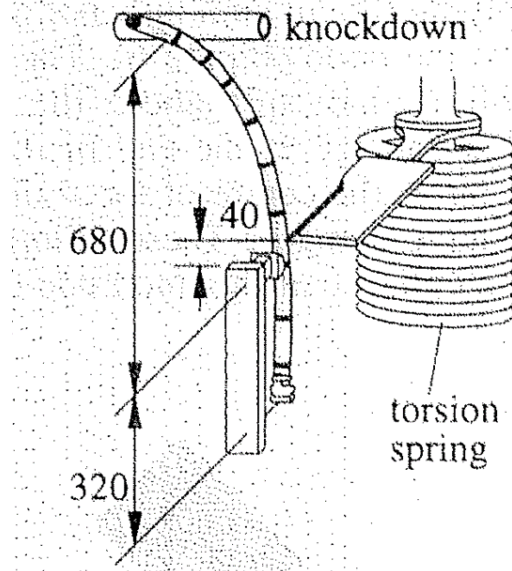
Cutting equipment by a single blade of a single stalk in Kroes (1996) – sample dimensions.
